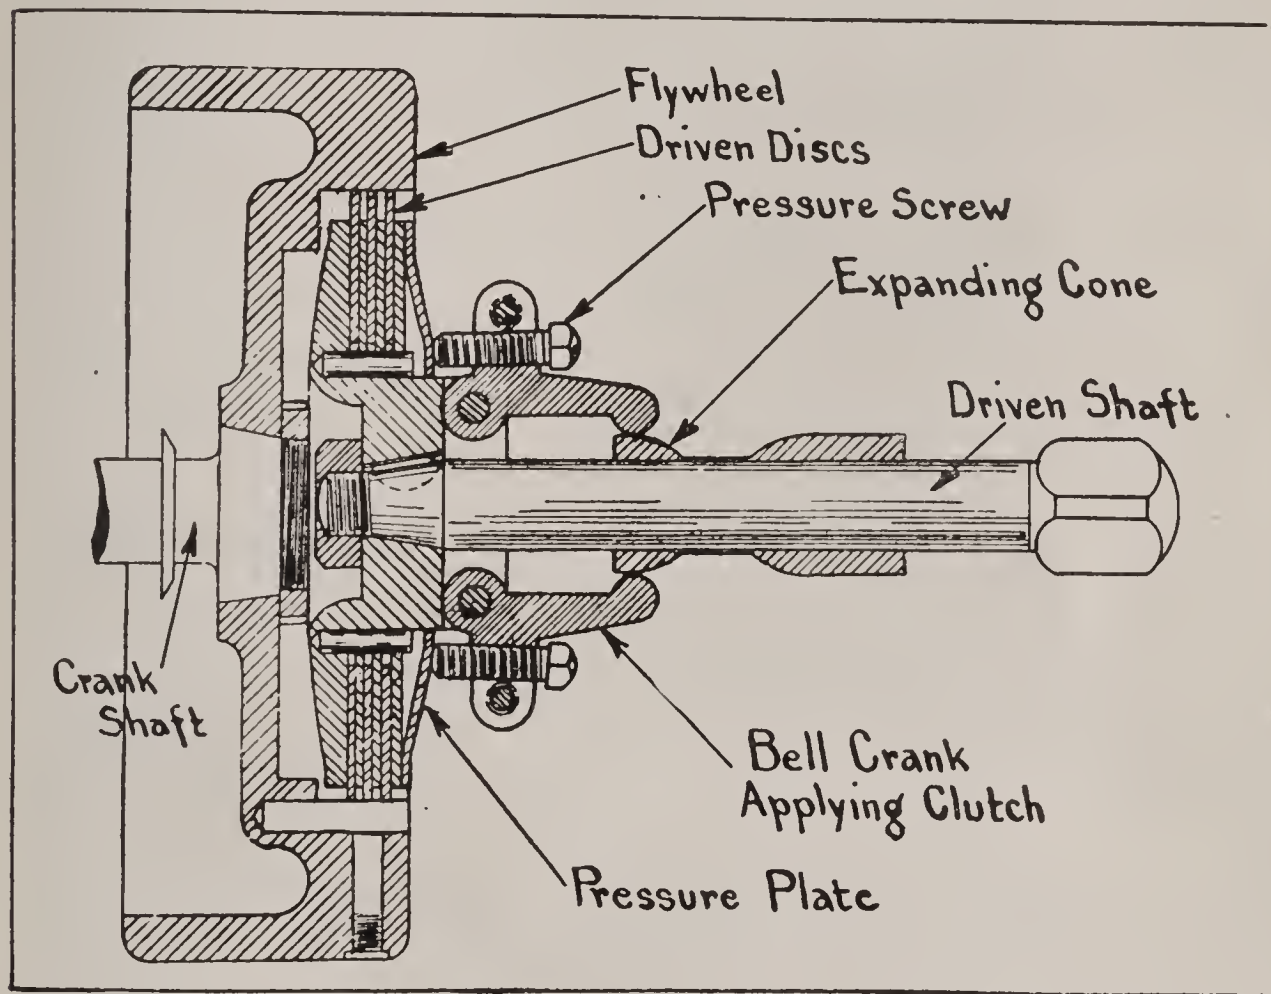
Sectional View of the Pierce Cone Actuated Multiple Disc Clutch.
